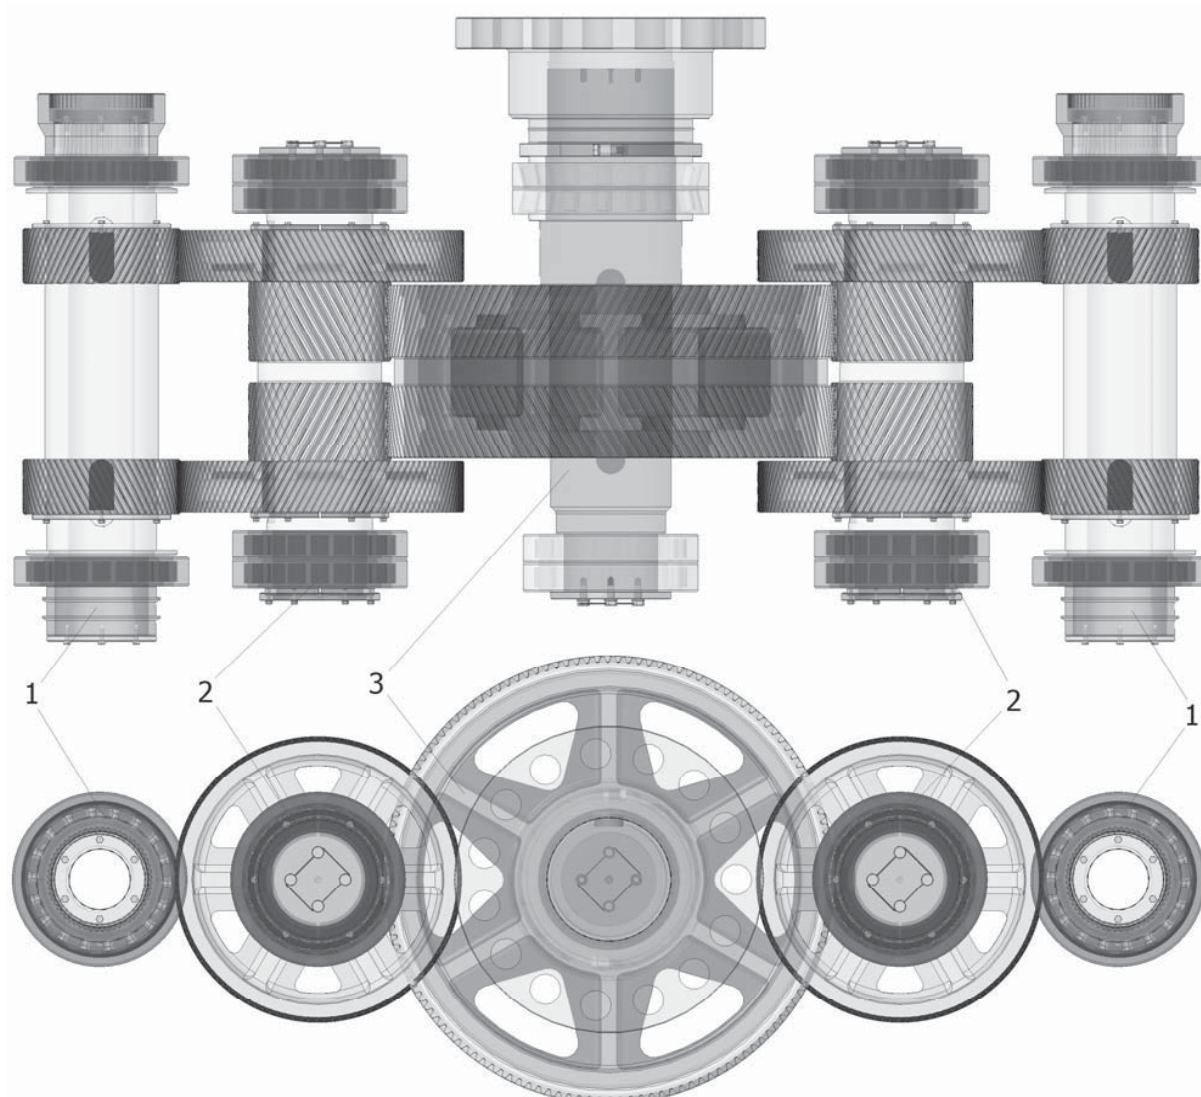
Transmission of the transmission gear of MK 2,1x4 winding machine
